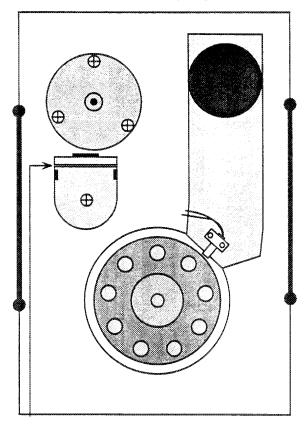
Adjust the brake with a 0.012-inch feeler gauge. 9. At the time of failure, clearance might be as much as 0.075 inch. Loosen the solenoid holding screw and adjust for 0.012-inch clearance.
